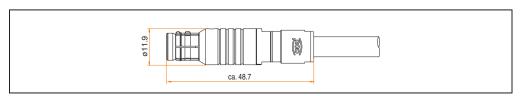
Plug dimensions (ODU Minisnap) - X2X cable 5CAX2X.0xxx-00
